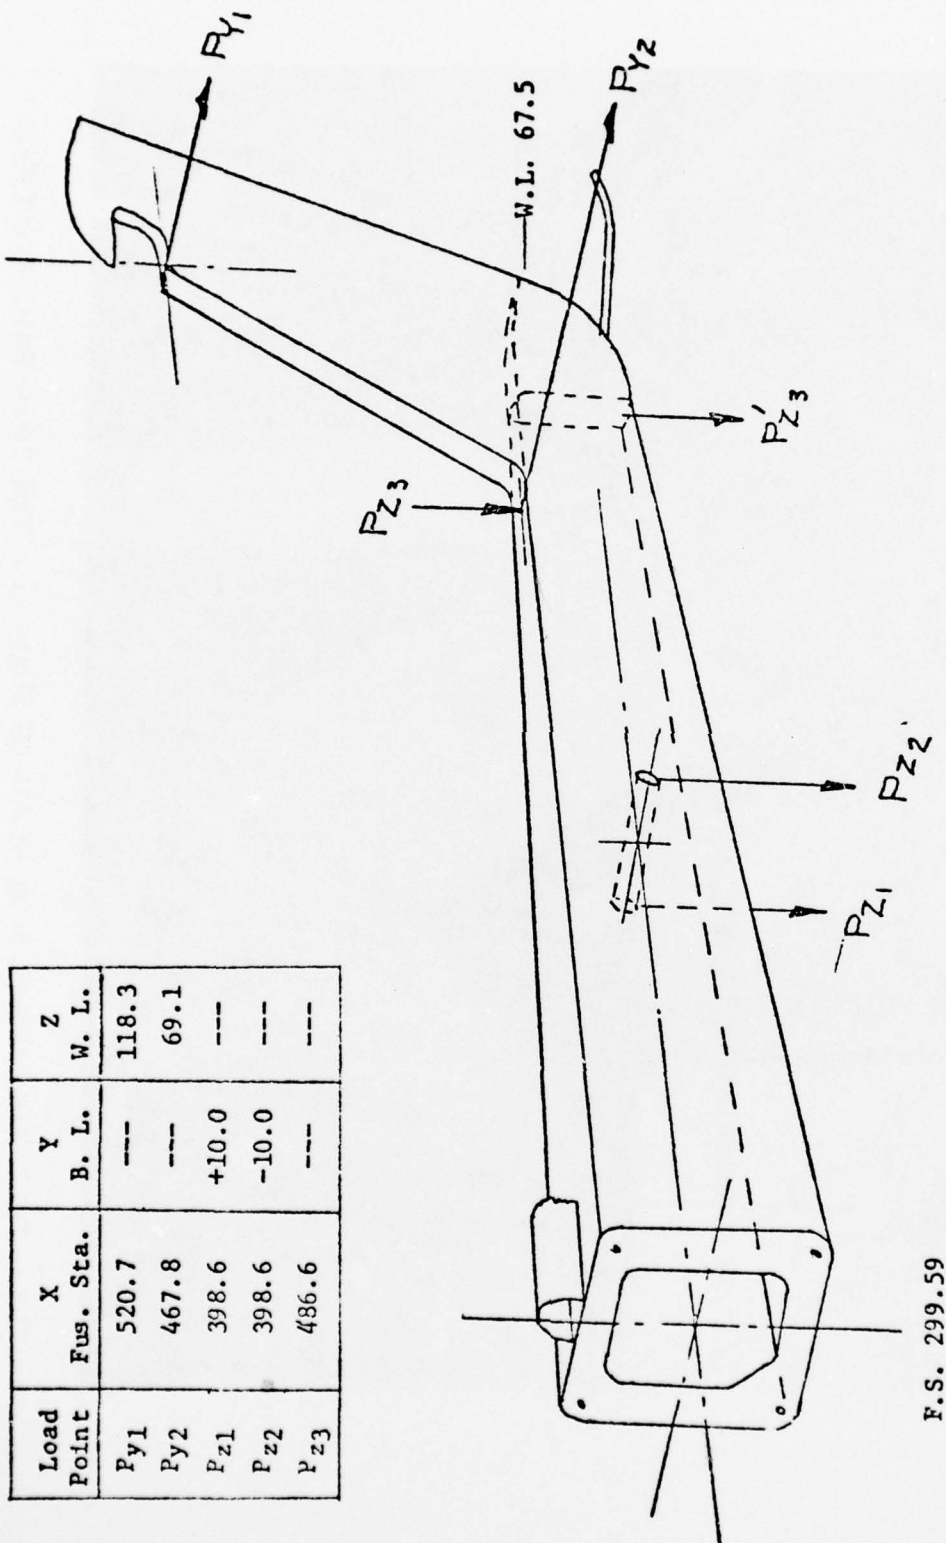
Schematic Representation of Load Point Locations and Load Direction for the AH-1G Flight Test Tail Boom Structural Test.
